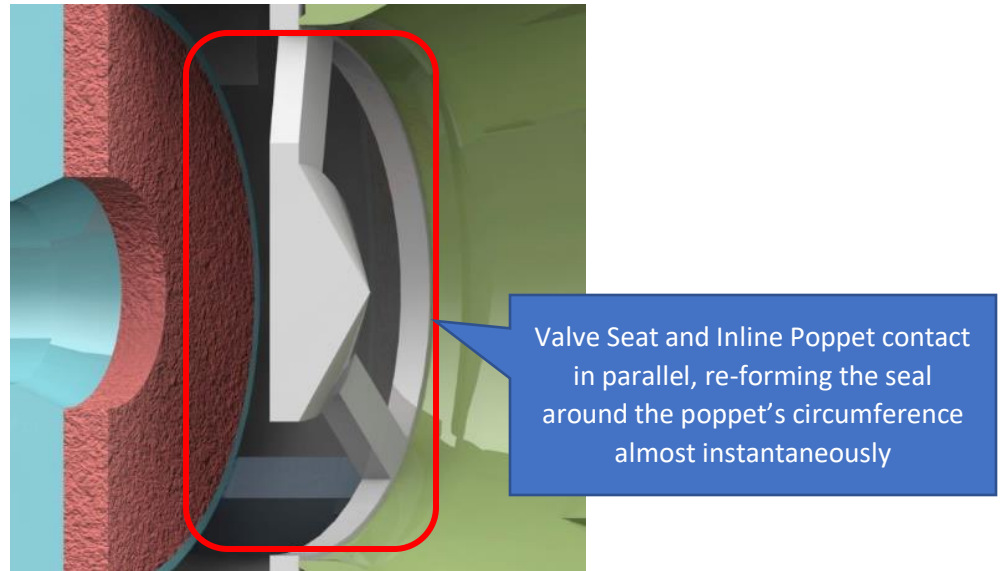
Close-Up Illustrating Inline Check's Flat Sealing Surface. Adapted from Figure 23.
